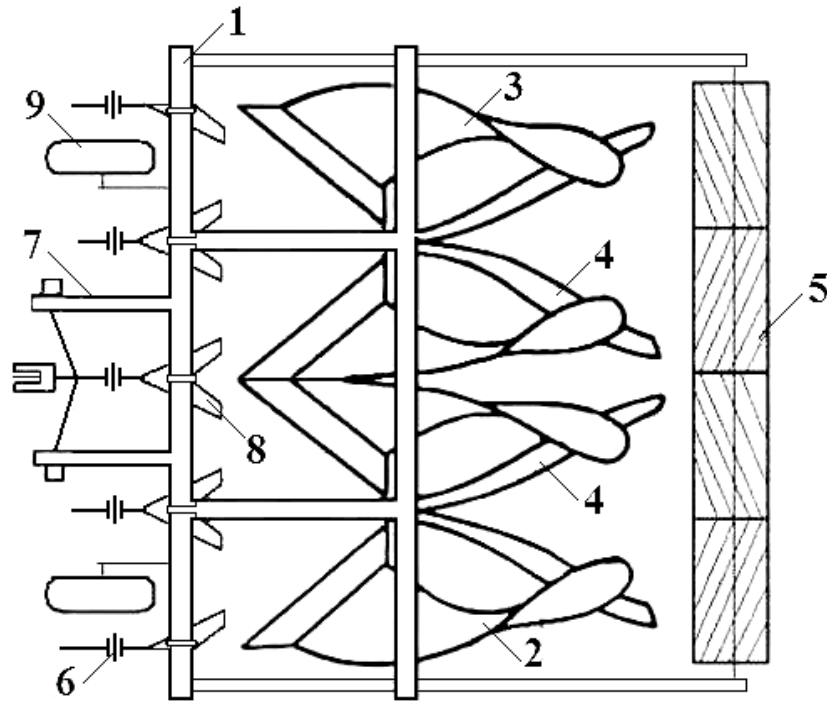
Frontal plugging with a flat cutting angle cutter constructive scheme
